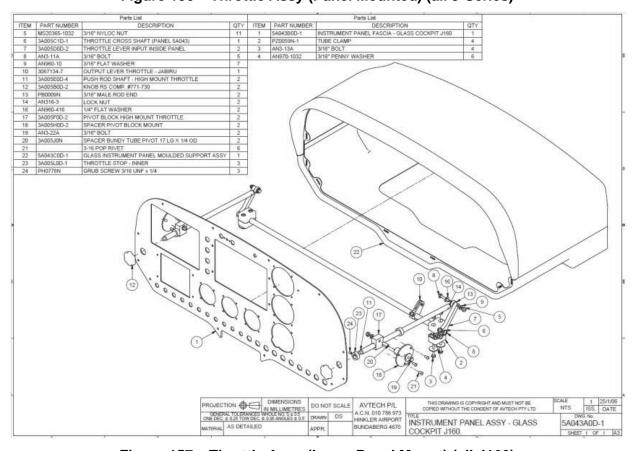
Throttle Assy (Large Panel Mount) (all J160)
